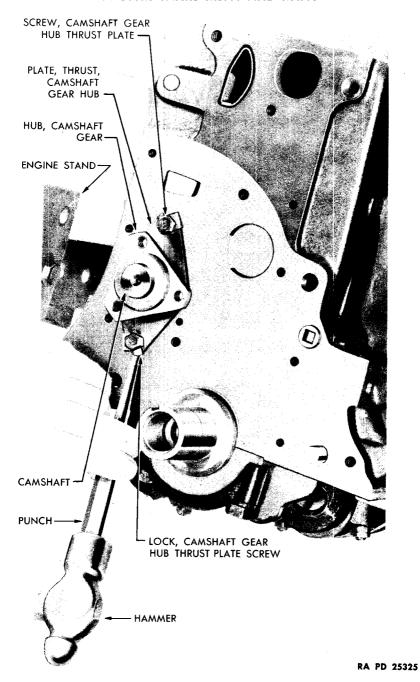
Bending Tabs On Camshaft Thrust Plate Lock Screw
